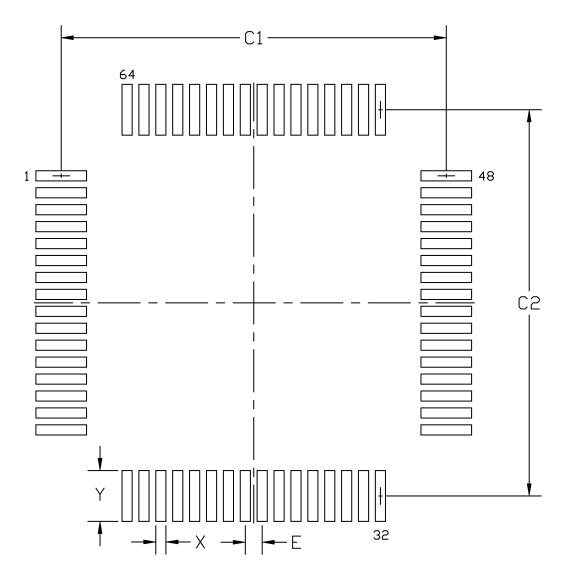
TQFP64 PCB Land Pattern Drawing
